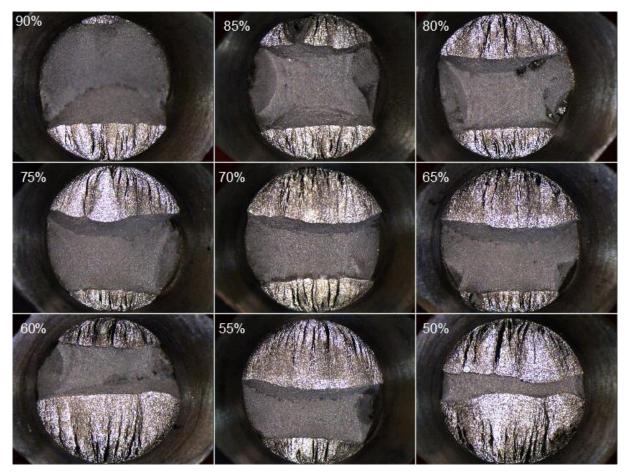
Comparison of fractures in test pieces after fatigue tests showing different damage levels – the grip side of a test piece.
